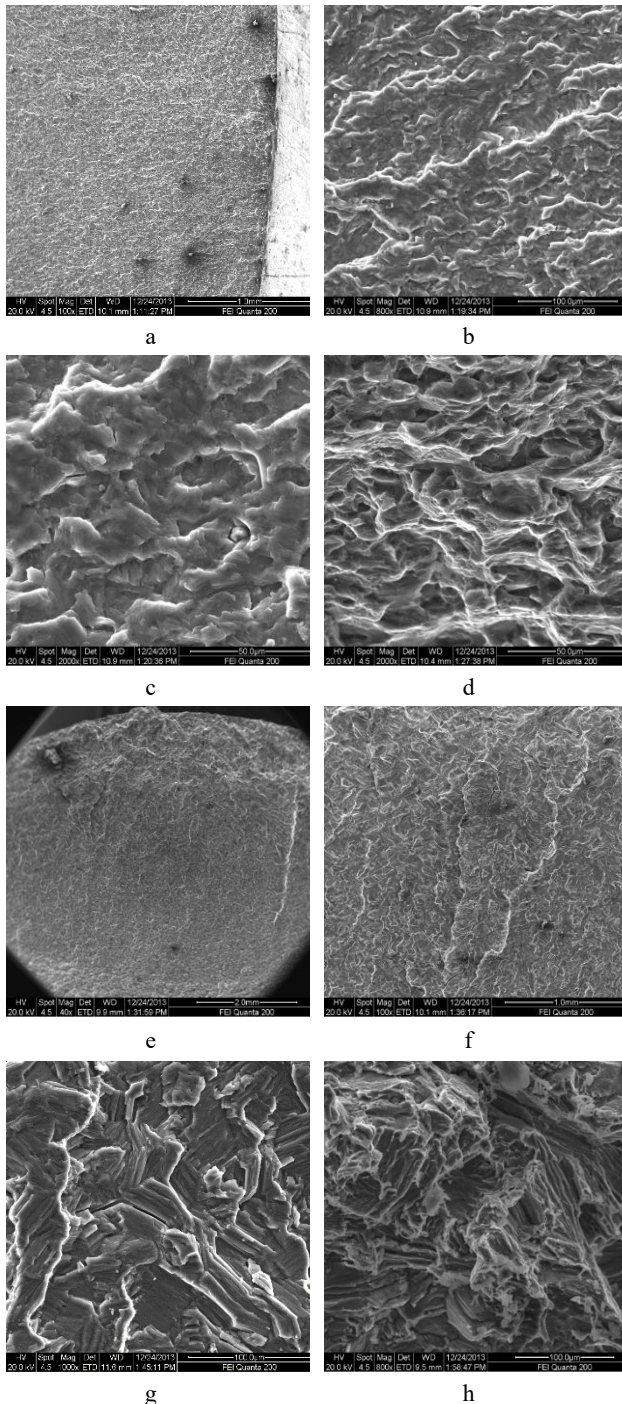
SEM images of fatigue fracture surfaces: a – crack initiation site; b – crack propagation zone; c – secondary cracks in base metal; d – torn edges on the fracture surface; e – crack initiation site of welded joint; f – fracture surface of butt joint; g – secondary cracks in butt joint; h – the final fracture zone of butt joint
